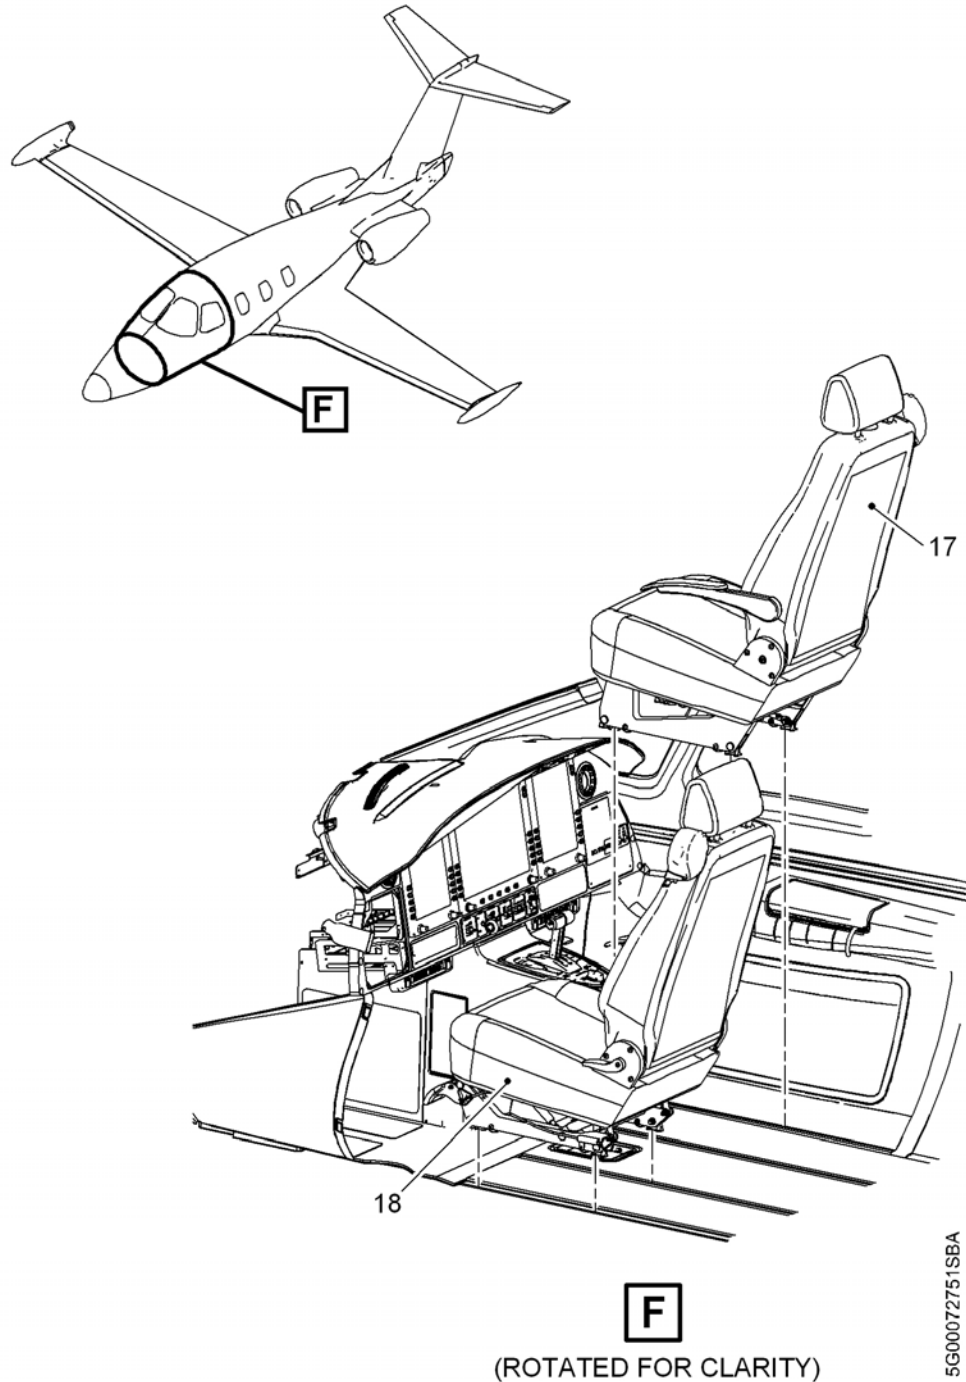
Initial Set-Up Before Removal and Installation of Pitot/AOA Assembly (Sheet 3 of 4)
